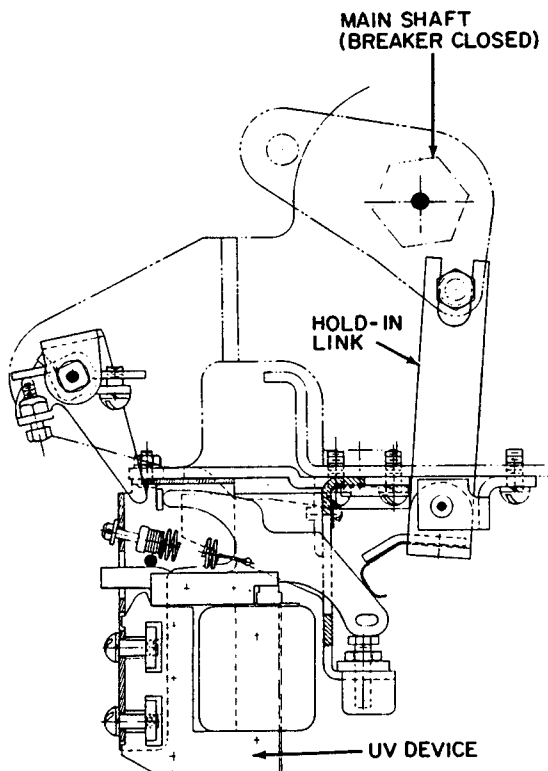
ELECTRIC LOCKOUT BY-PASS
